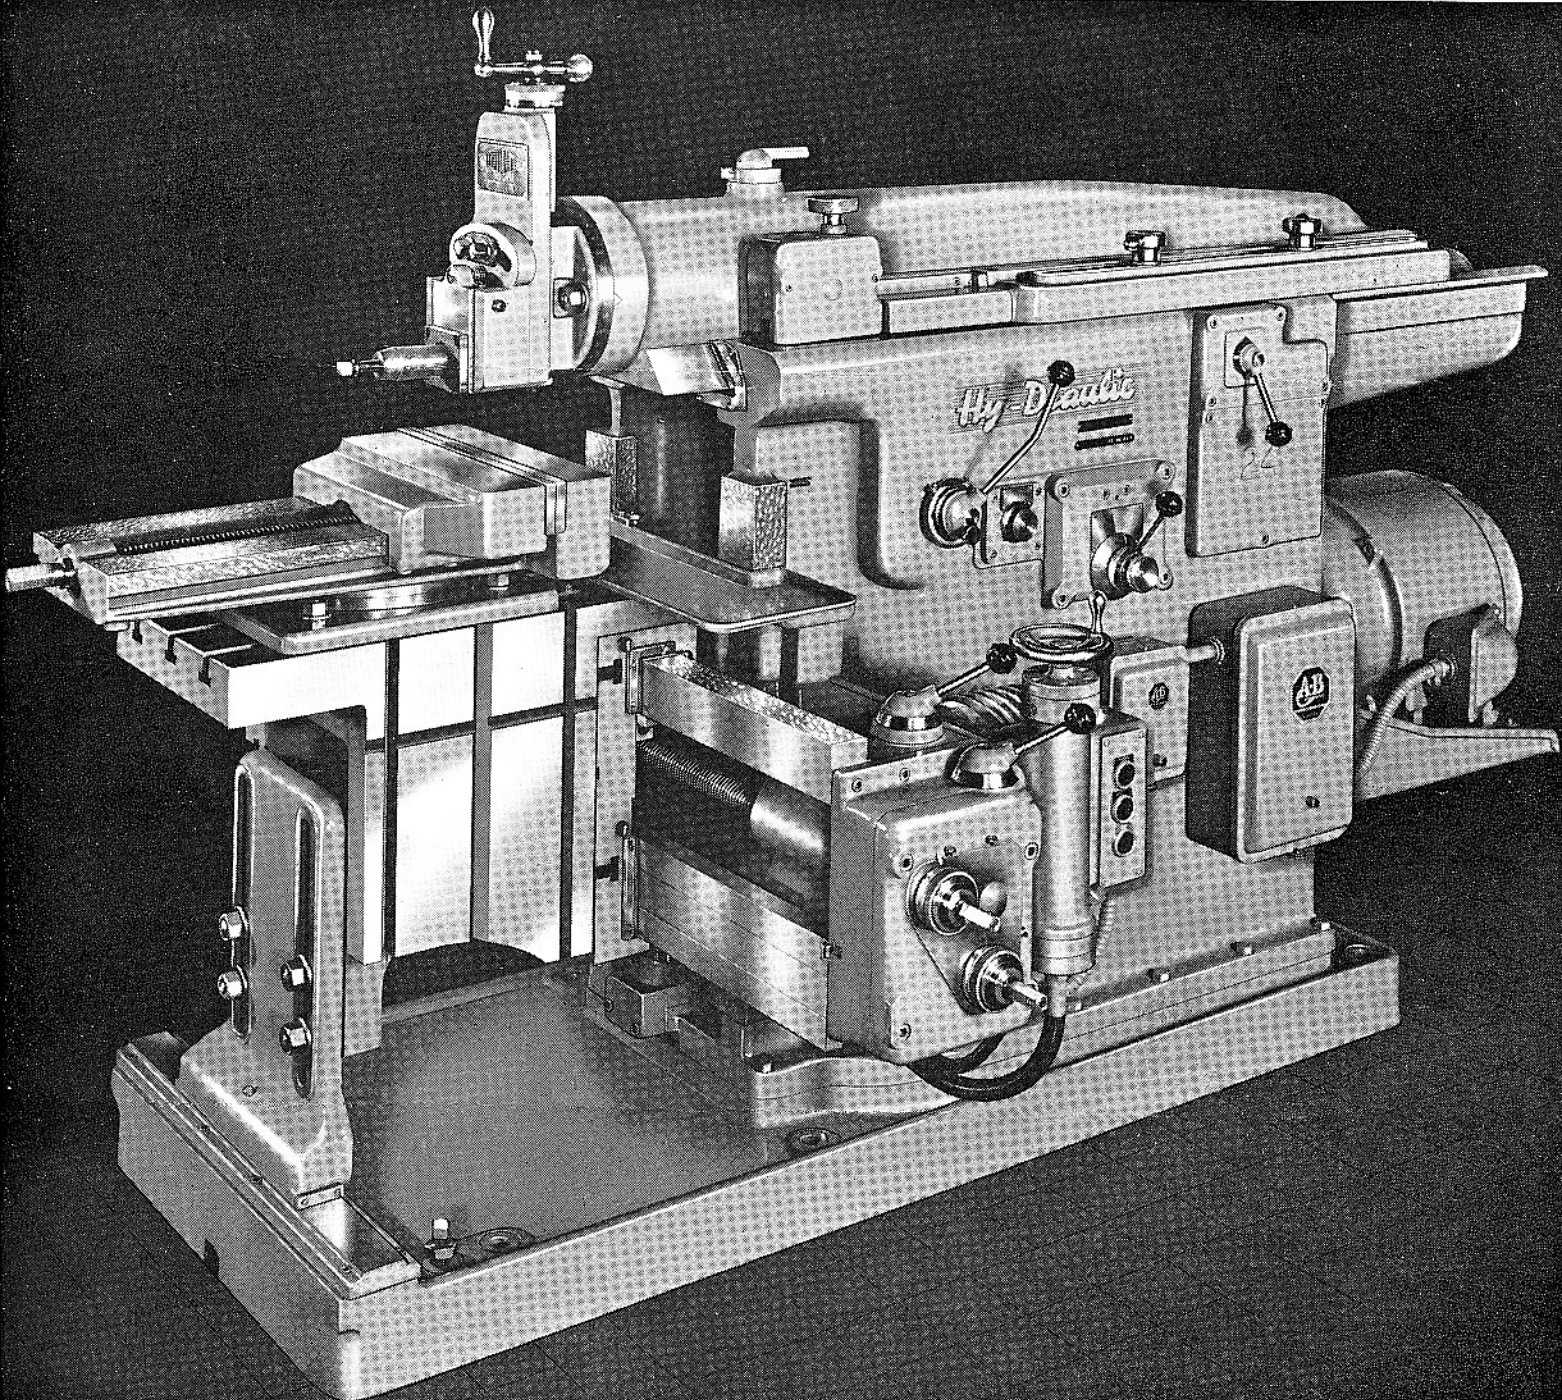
Hy-Draulic Shaper saves power, removes metal faster.
